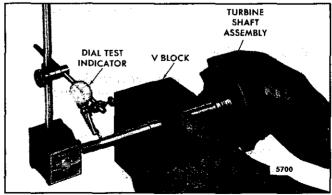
Measuring Concentricity Between Large and Small Turbine Shaft Diameters
